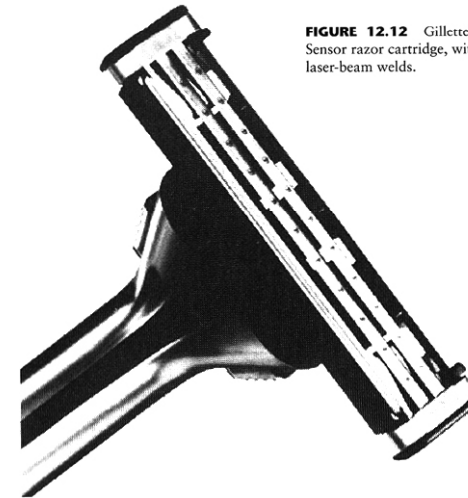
Gillette Sensor razor cartridge, with laser-beam welds.
